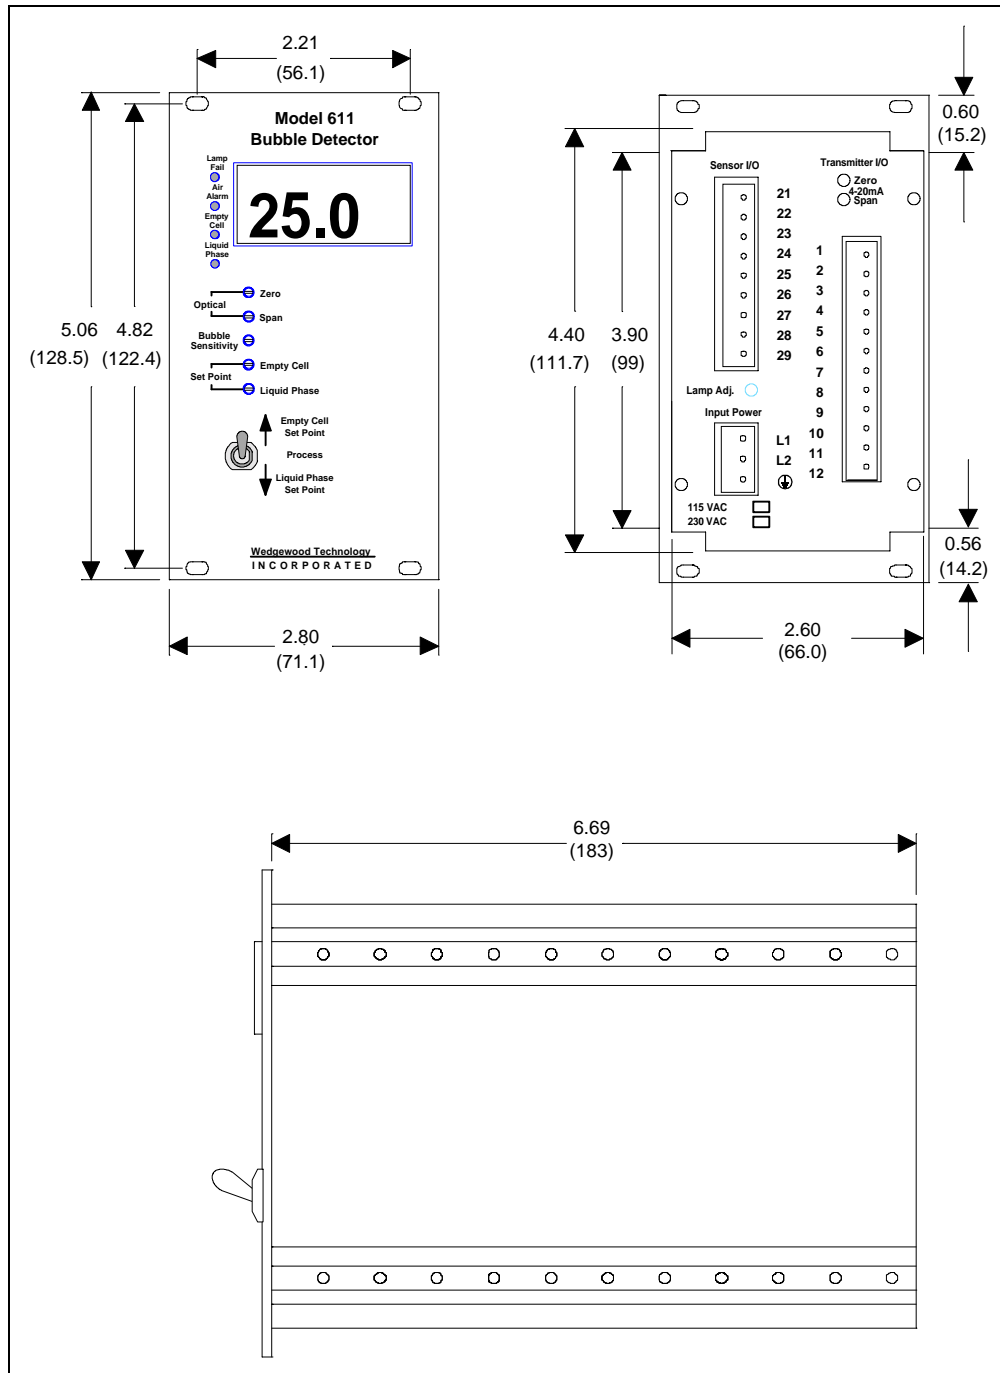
Model 611 Bubble Detector Dimensions - Inches (mm)
